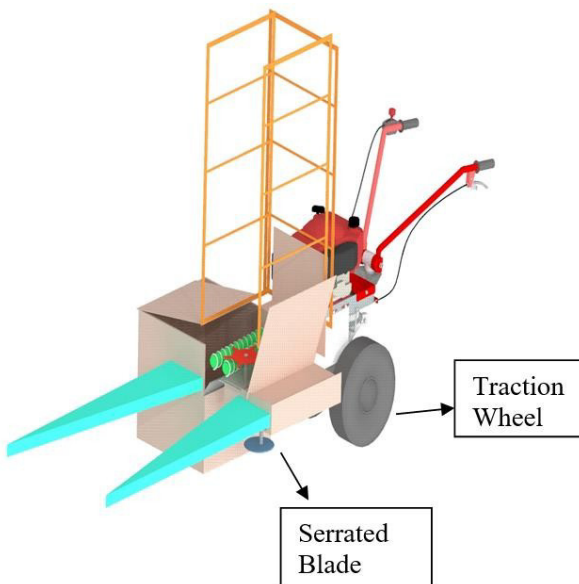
Maize Stalk cutter cum cob picker machine (Side View)
